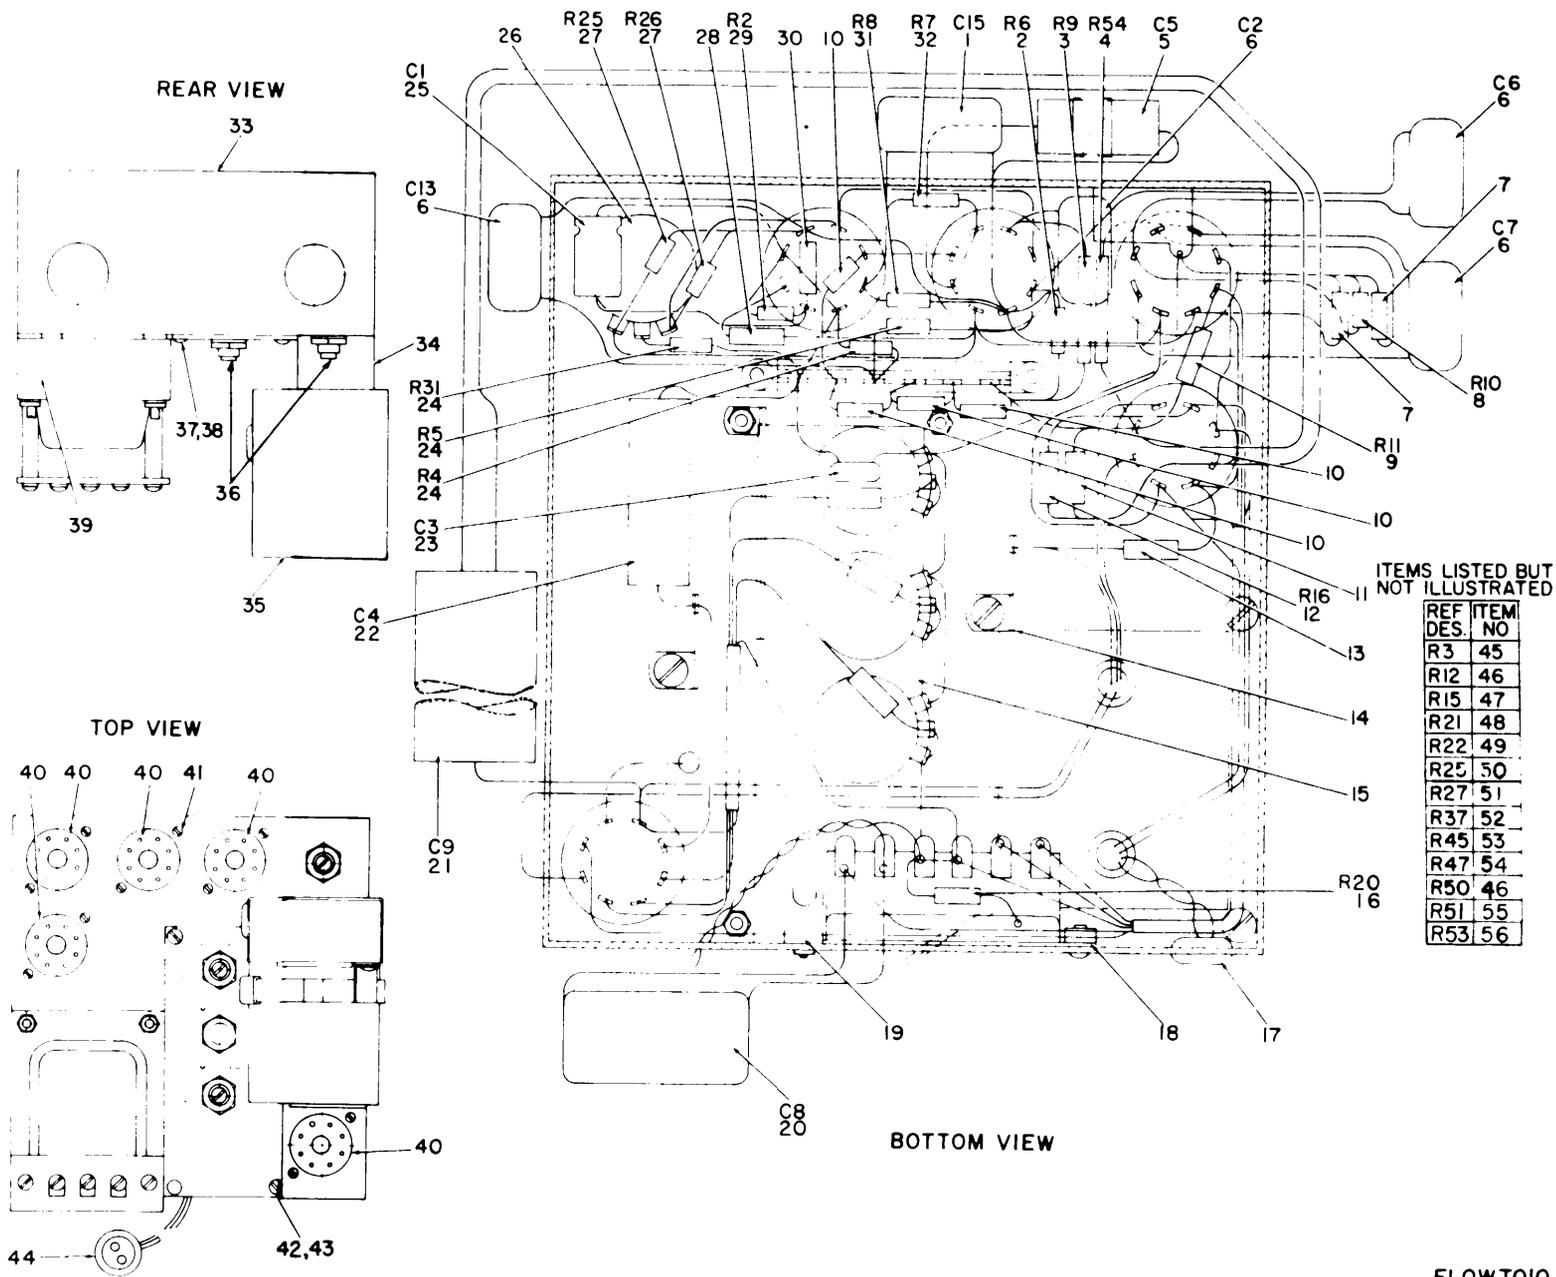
Voltmeter, Electronic ME-227/U, Chassis Assembly.
